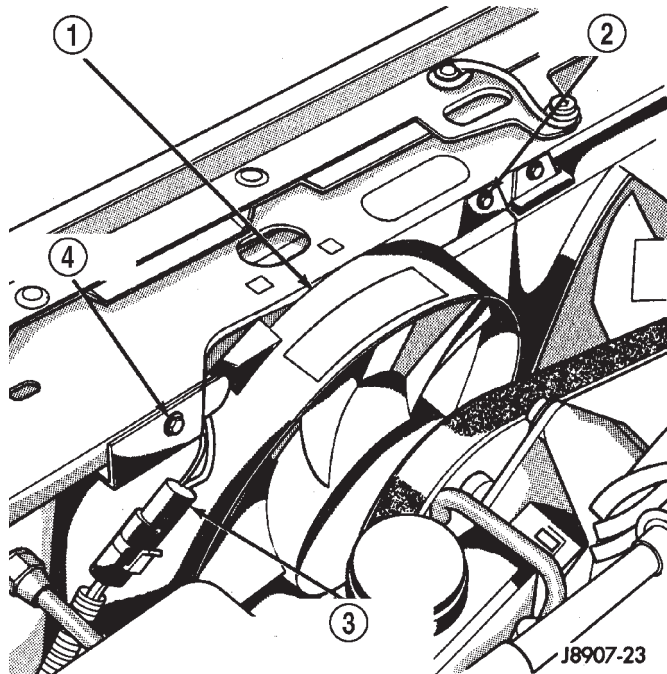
Auxiliary Cooling Fan—Remove/Install—Typical
